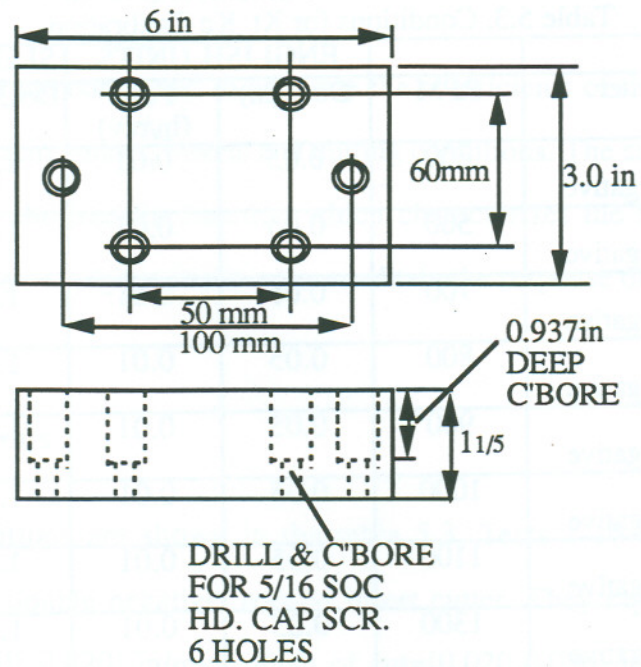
Workpiece for the Continuous Cut Calibration Tests.
